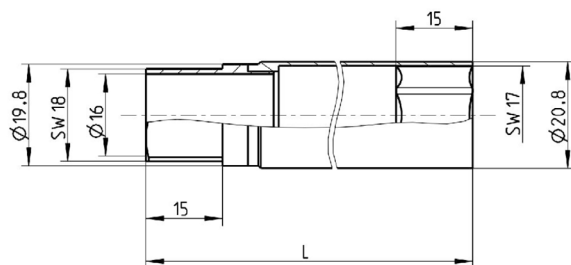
Mounting tool Hex17/18 Type 1300A4/1300A4Q01/1300A4SP100-400
